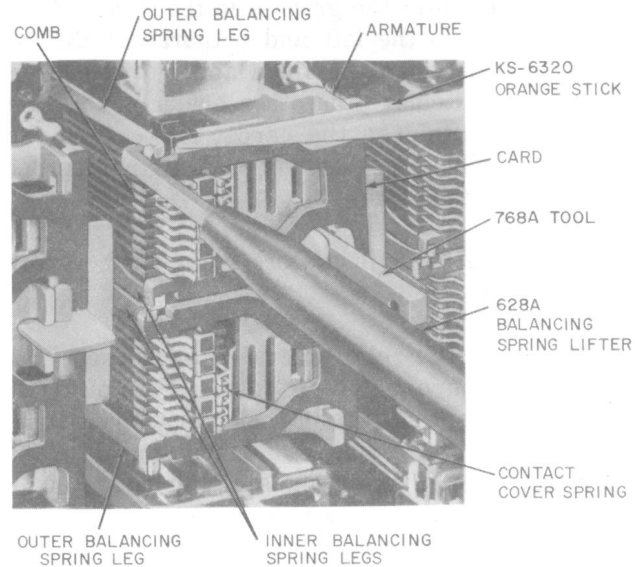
AM-Type Relay—Disengaging Outer Balancing Spring Leg From Upper Card
